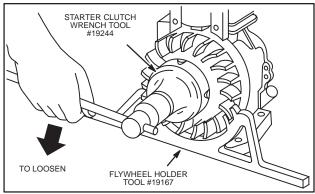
REMOVING REWIND STARTER CLUTCH
